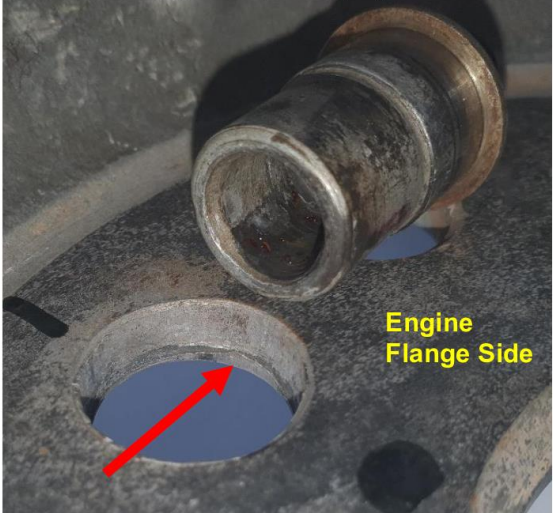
Locating Bush position showing mechanical smearing/lip (Stereo)
